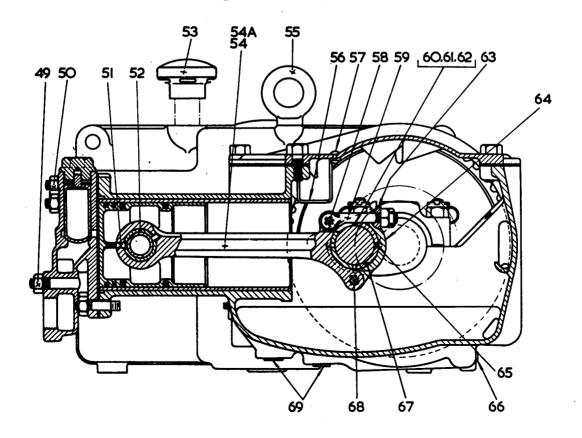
COMPRESSOR - SECTION THROUGH CYLINDER.
